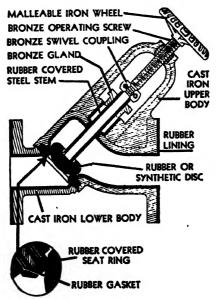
A Vulcalock valve suitable for handling corrosive and abrasive fluids under fairly high pressure, pulsating pressure, throttling, or vacuum.
